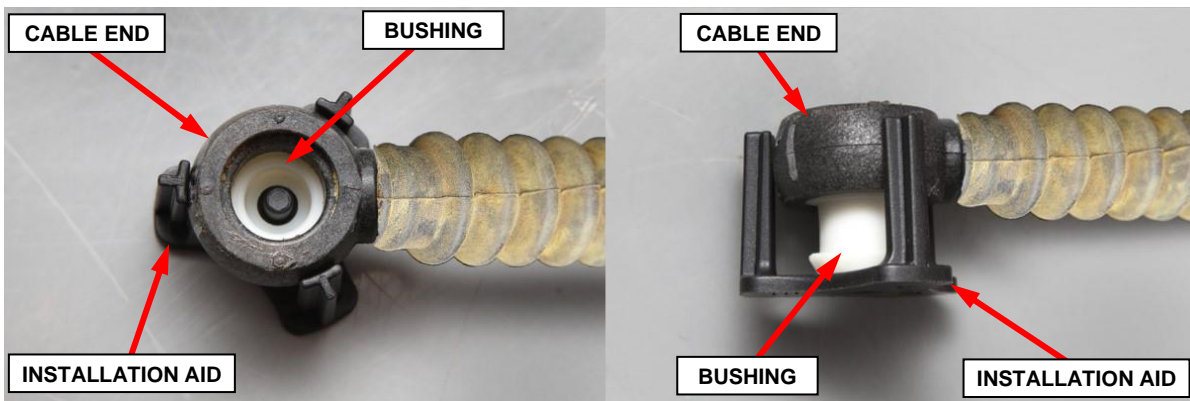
New Bushing and Installation Aid Positioned on Cable End
